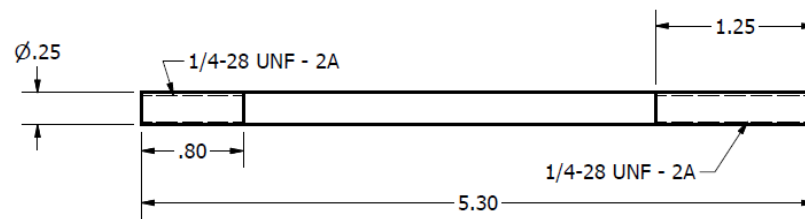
Threaded rod drawing. Measurements in inches. Screws into rear of sting or dummy sting.
